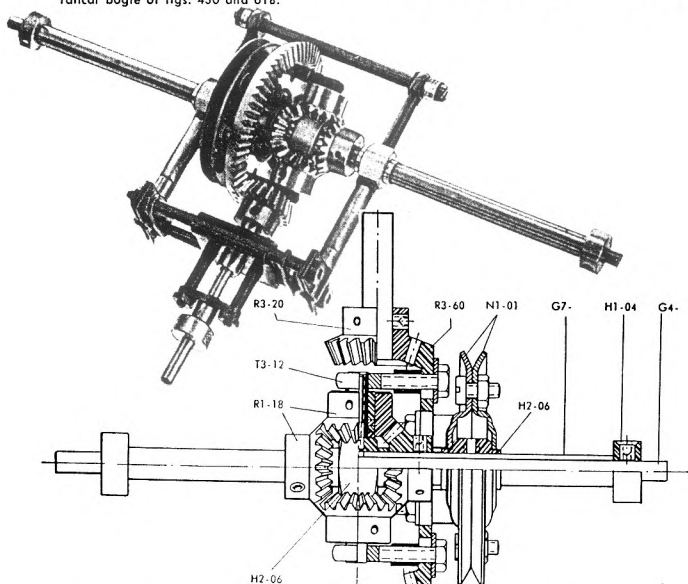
To build the differential in fig. 711, begin by assembling Wheel Discs N1-01 and Shaft Head H2-06; then install four Screws T1-15 fitted with Tapped Sleeves A5-05, and use Sleeves H4-05 and Rings H3-04 as spaces between Wheel and Crown Gear. Take care that the wheel is correctly mounted on the shaft and does not wobble. Then mount Crown Gear complete with satellite shafts. The satellites are fitted with a Sleeve H4-05 and three Rings H3-04 each, serving as bushings. When mounting the Eye Screws holding the satellite shafts, check that the Tapped Sleeves A5-05 do not touch the gears.
